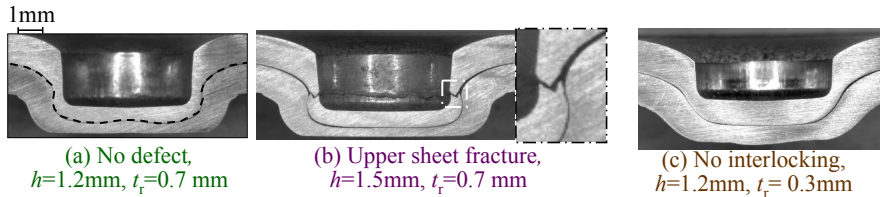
Joining defects. (a) no defect, (b) upper sheet fracture and (c) no interlocking.
